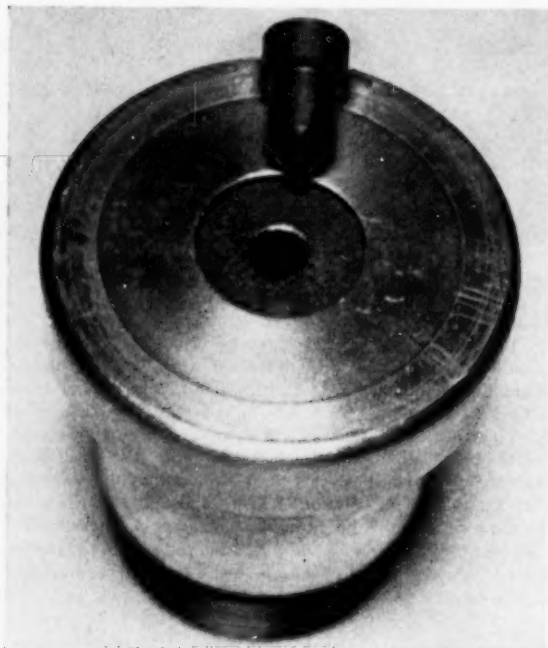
ERODED CAST BORON-CARBIDE SEAT INSERT AND PLUG FOR SEVERE THROTTLING CONTROL VALVE
